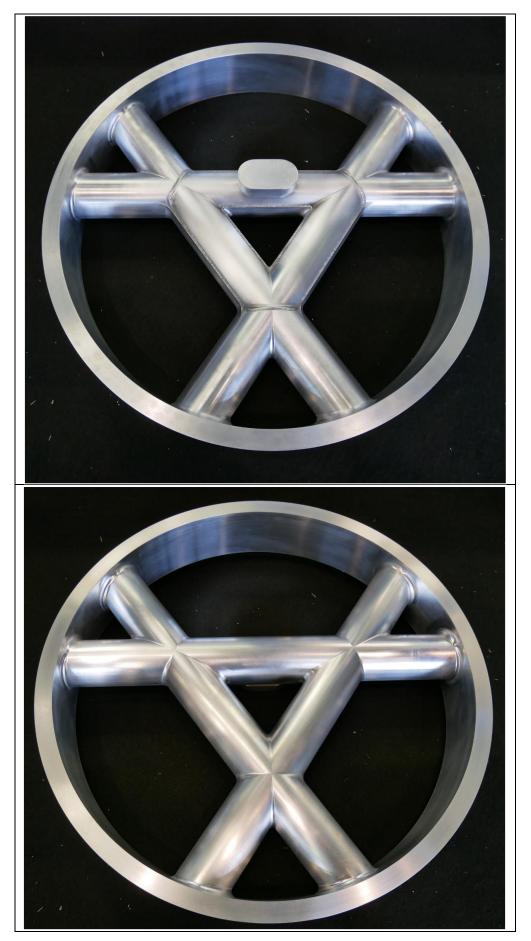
Final STS SNS Tube Moderator Unit, top view (top) and back view (bottom)298-DOC-20230131-STS-SNS-Moderator-Final-Report-V03.docxPage 27(78)
